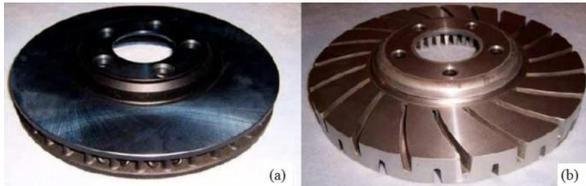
a) Brake disk (weight: 8.44 kg), manufactured from gray cast iron used in the sedan automobile, b) brake disc made of Al-SiC composite material (weight: 3.32 kg) specially designed for the same automobile [57].
